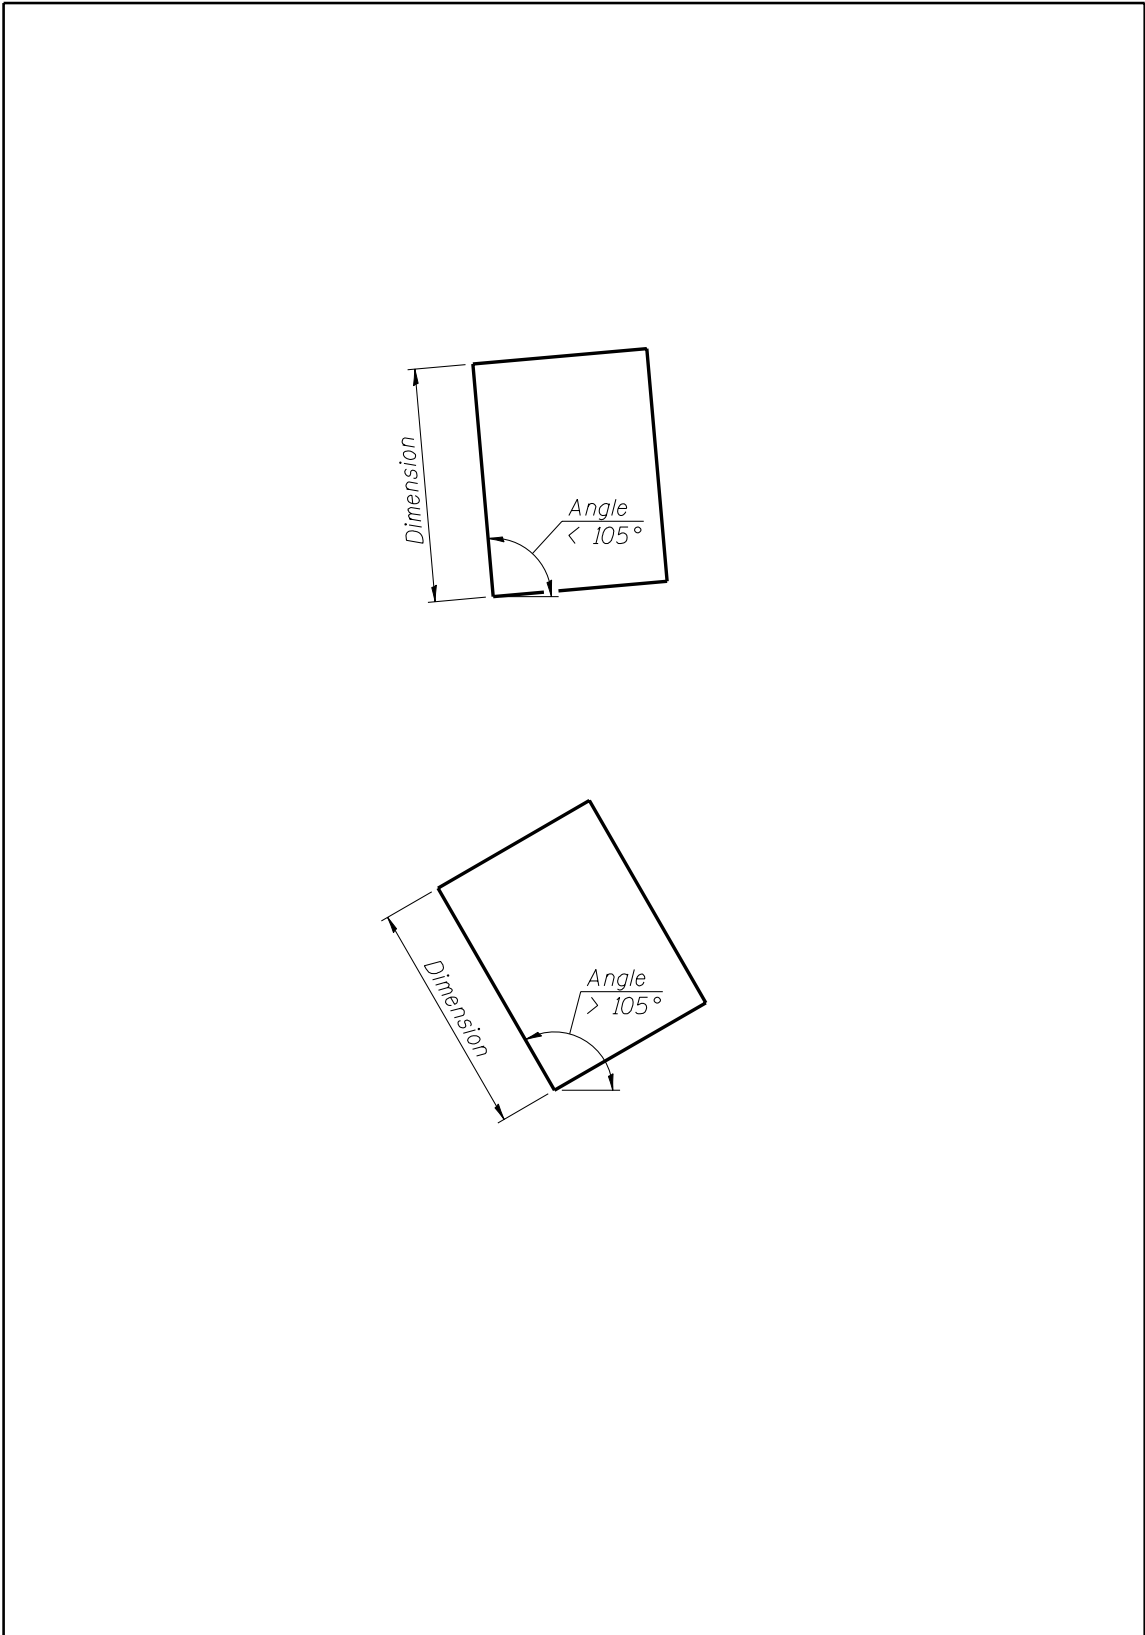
Dimension Placement and Callouts (Example #2)
